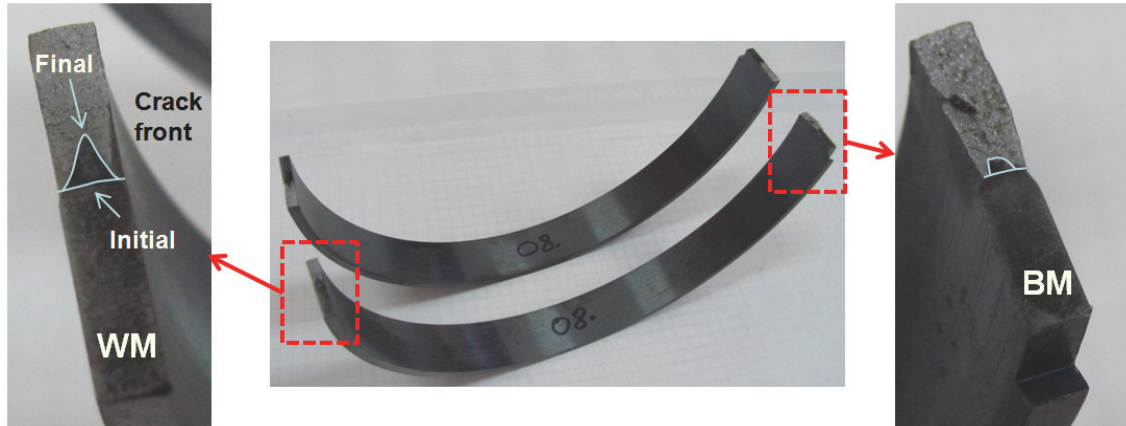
Fractured ring specimen S-WM(168)-3, with fracture surfaces in weld metal and base metal
